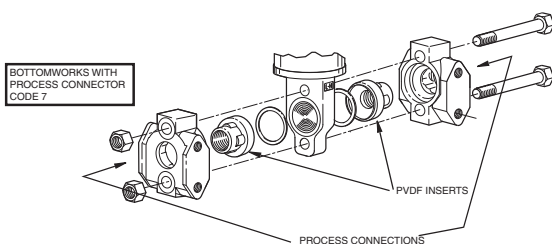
Replacing the Sensor Assembly (pvdf Inserts)
